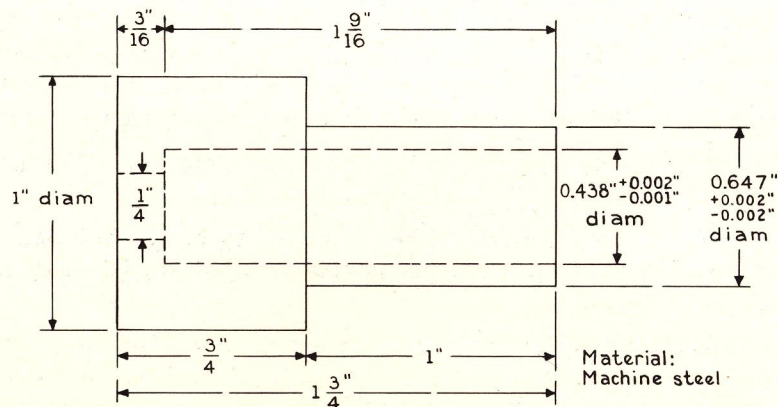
Collar for Removal of Commutator-end Ball Bearing
